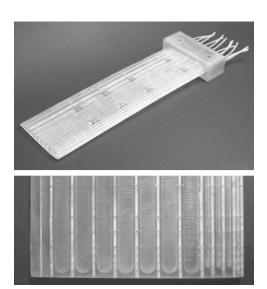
Surface-pressure model made on a stereolithography rapidprototyping machine. Lower photograph shows a closeup of the wing-tip region. The chord was 70 mm and each pressure tapping is 0.35 mm in diameter.
